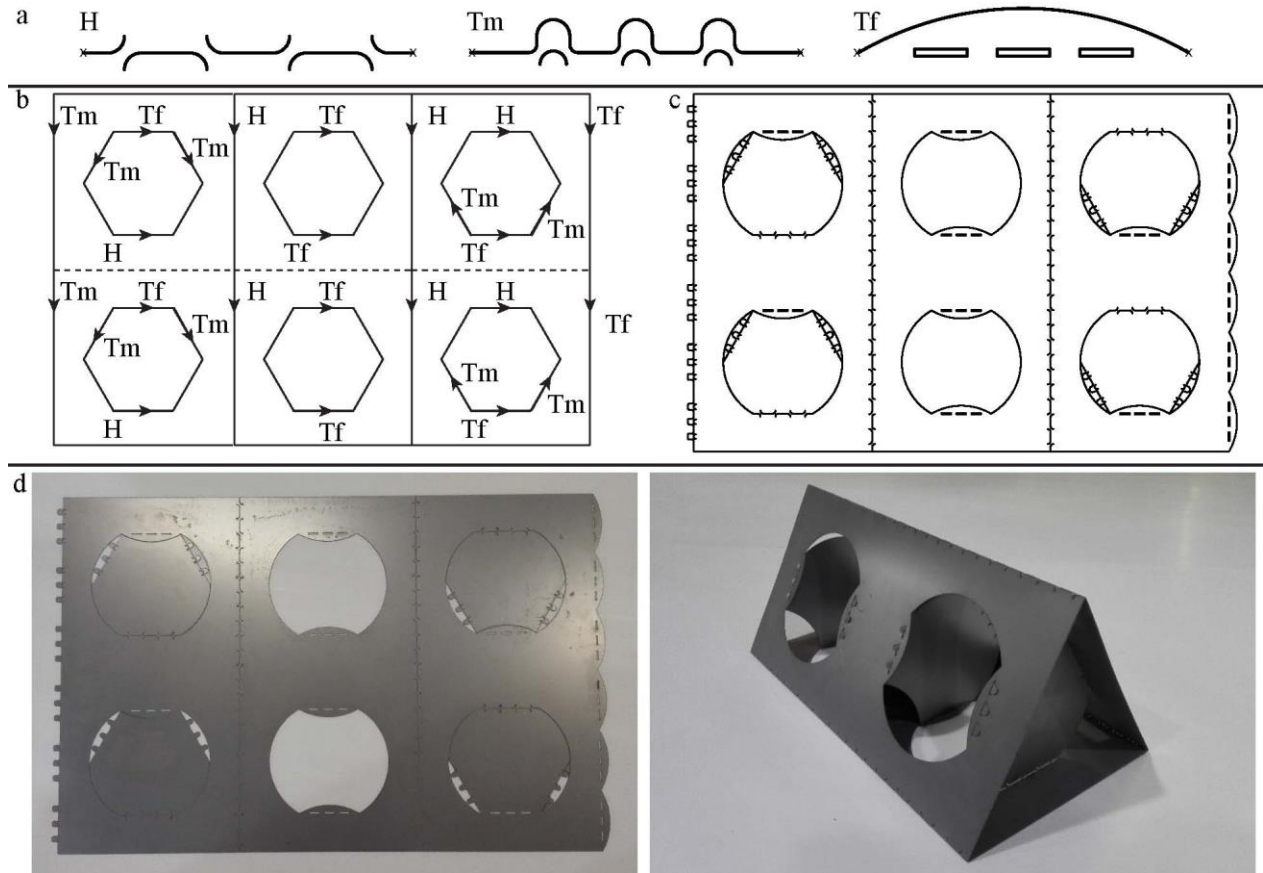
Steel prototype fabrication. a) Integral connection types. b) Connection locations. c) Part drawing. d) Waterjet cut and folded part.
